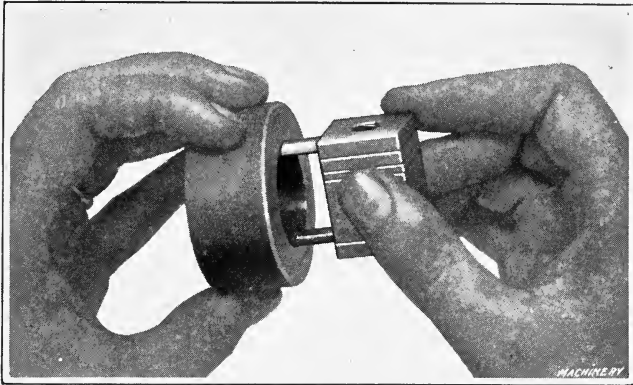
Application of Size Blocks and End Measuring Attachments for checking the Diameter of a Plug Gage
